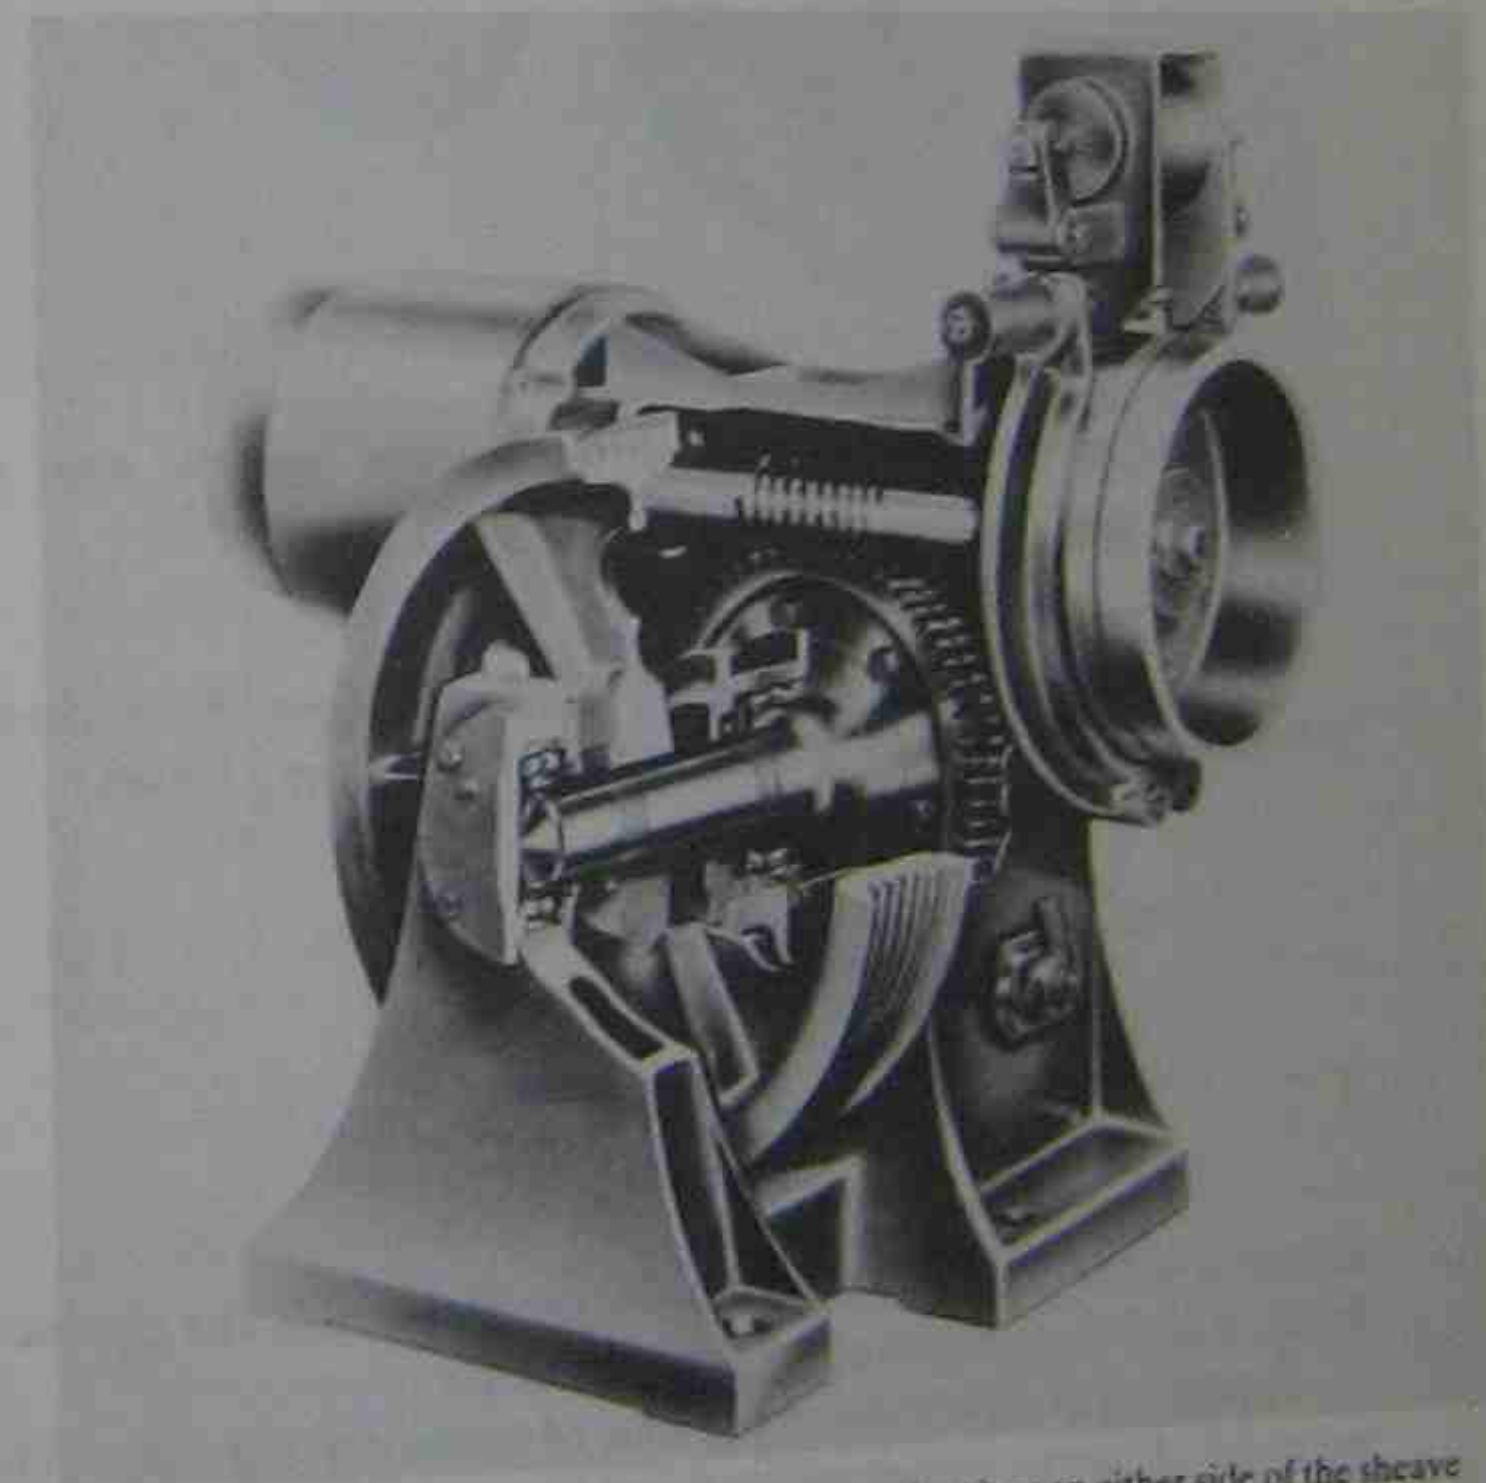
A low-speed shaft supported by two bearings on either side of the sheave (Otis Elevator Co.).
